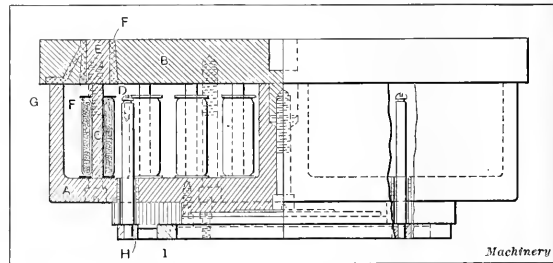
Cross-sectional View of Heald Rotary Magnetic Chuck
